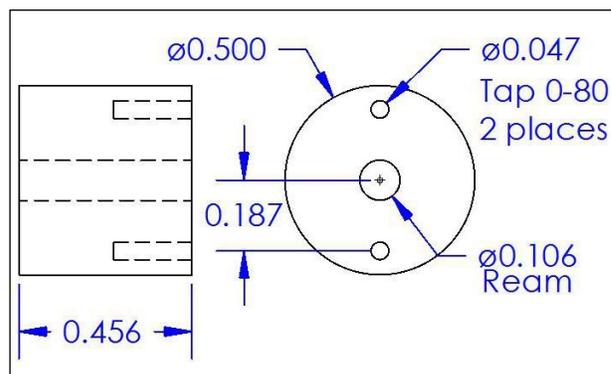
Construction drawing for the pallet spacer. One set of #56 holes (.047") are initially drilled and tapped. The location of the remaining set of holes is determined by positioning the pallets on the test assembly.
